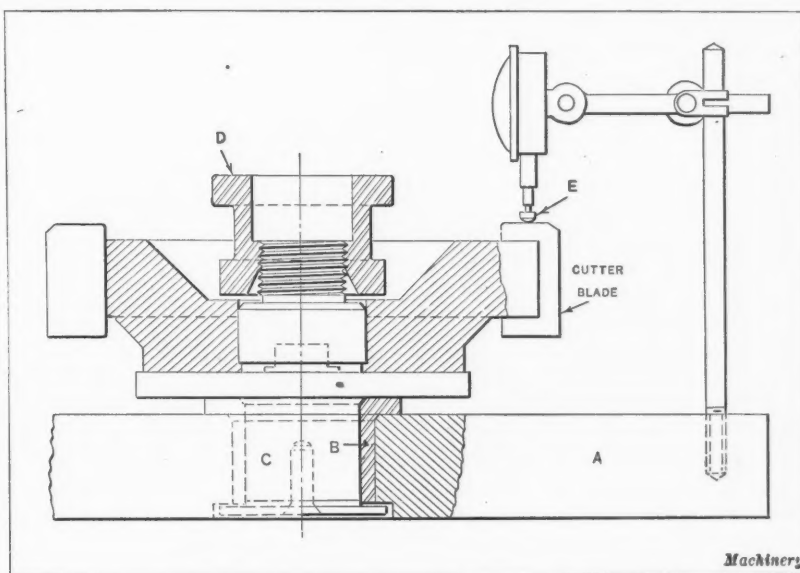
Fixture for testing Cutter Blades for Uniform Height
